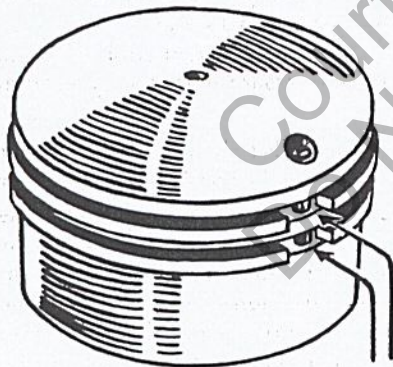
3 Checking Clearance of Piston Rings in Piston and Cylinder
